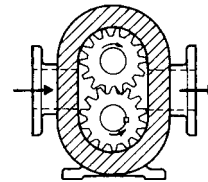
External-gear rotary pump. (Reprinted from "Hydraulic Institute Standards for Centrifugal, Rotary and Reciprocating Pumps," 14th ed., copyright 1983, with the permission of Hydraulic Institute.)
